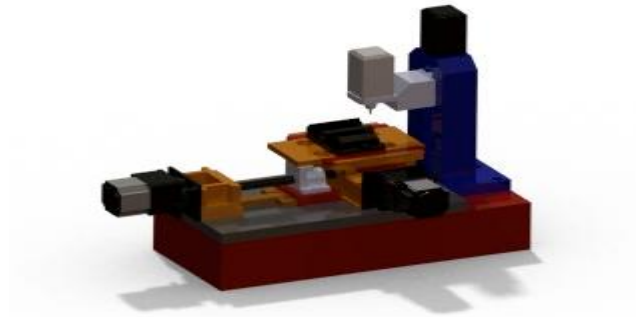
Another possible configuration of CMSS-CNC Lathe using modular design become 3-axis portable milling machine
